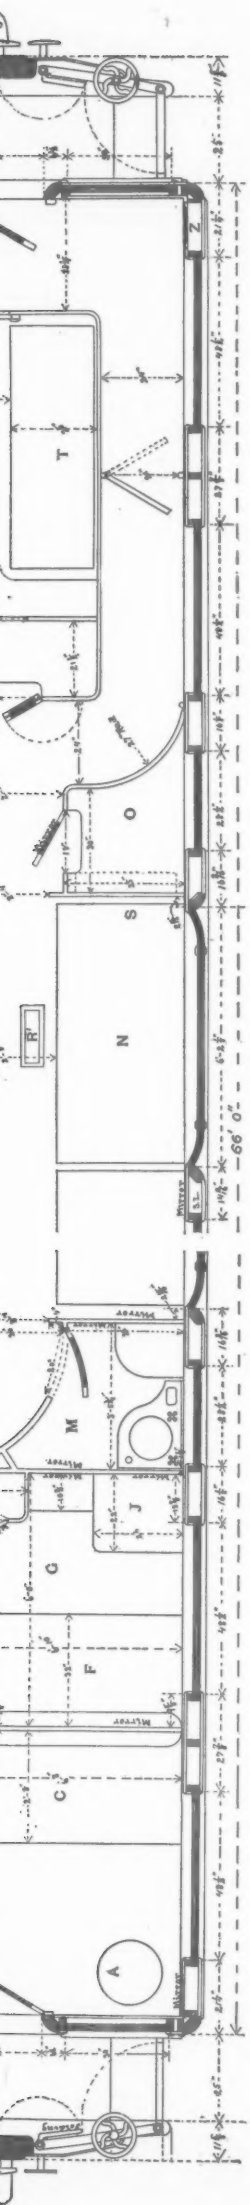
Floor Plan Showing Arrangement of Rooms.
